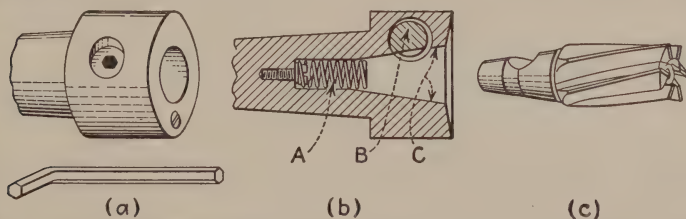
(a) Brown & Sharpe "cam-lock" adapter. (b) Sectional view showing: A, the spring to keep the shank of end mill floating to insure correct seating; B, cam-lock, draws end mill securely into taper and locks it there; C, standard milling-machine taper for quick release. (c) End mill with cam-lock shank.
